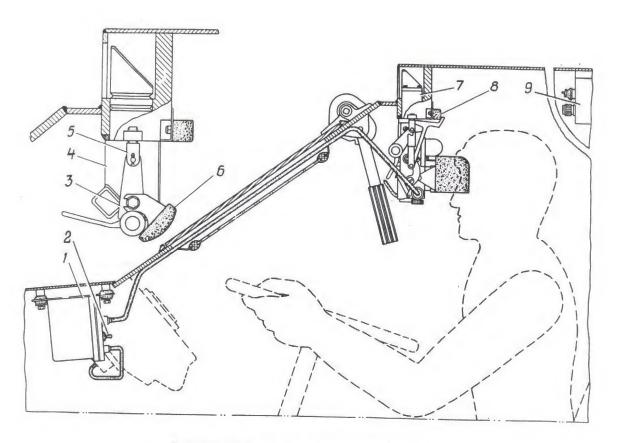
INSTALLATION OF DRIVER'S VISION DEVICES
